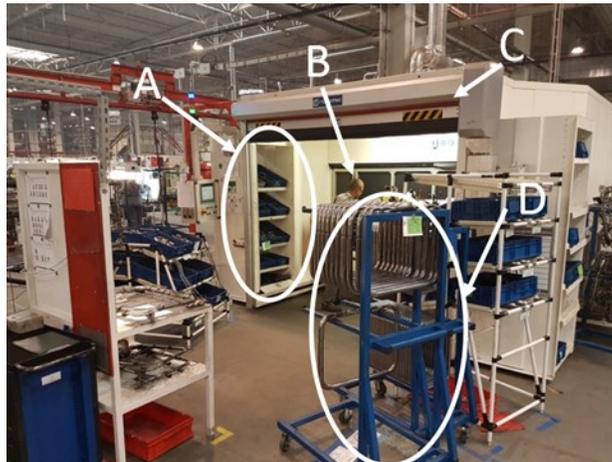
View of a basic automotive parts welding cell (Source: PUT).
